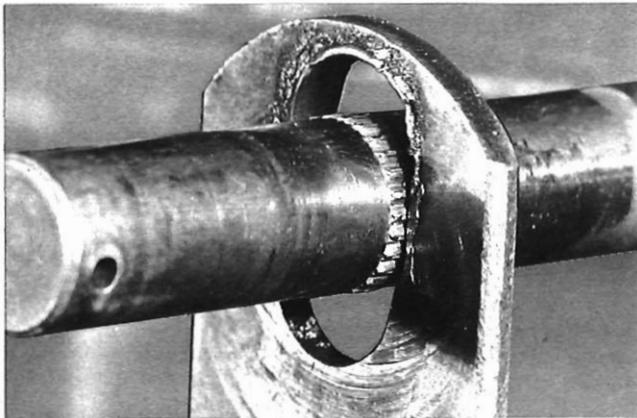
Milling-cutter action of the knurled spindle on the link plate
